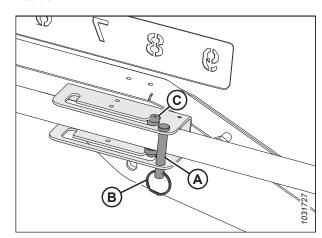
Outer Left Arm Cylinder - Aft Position
